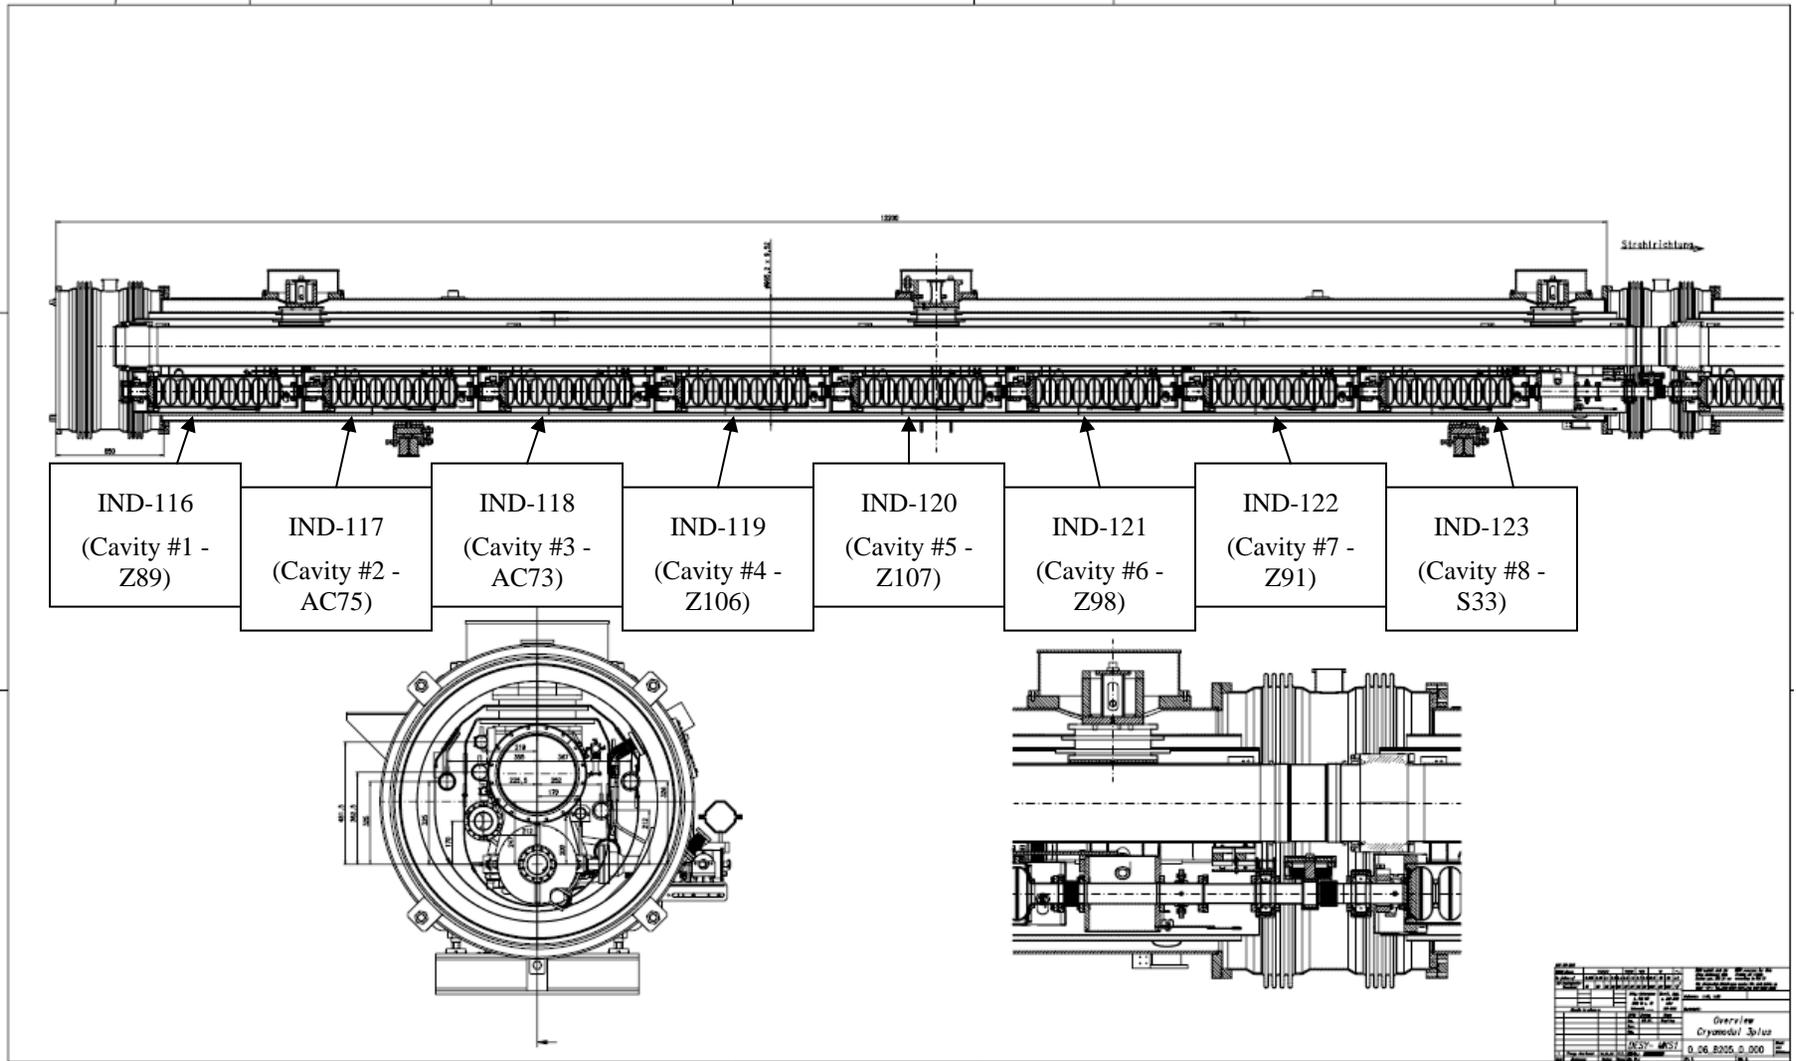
Cross Section of CM1 (DESY drawing 0-06-8205-0-000)
